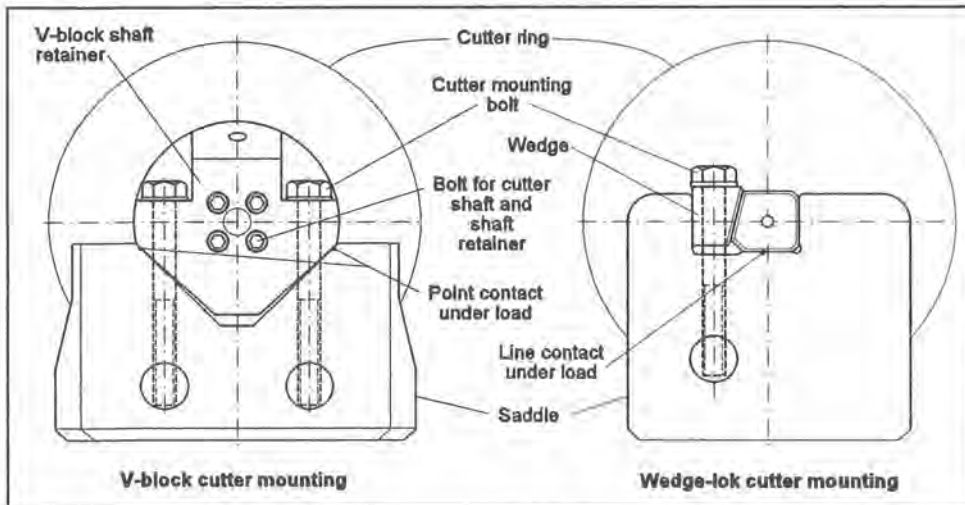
The new Wedge-lok mounting compared to the traditional V-block mounting
